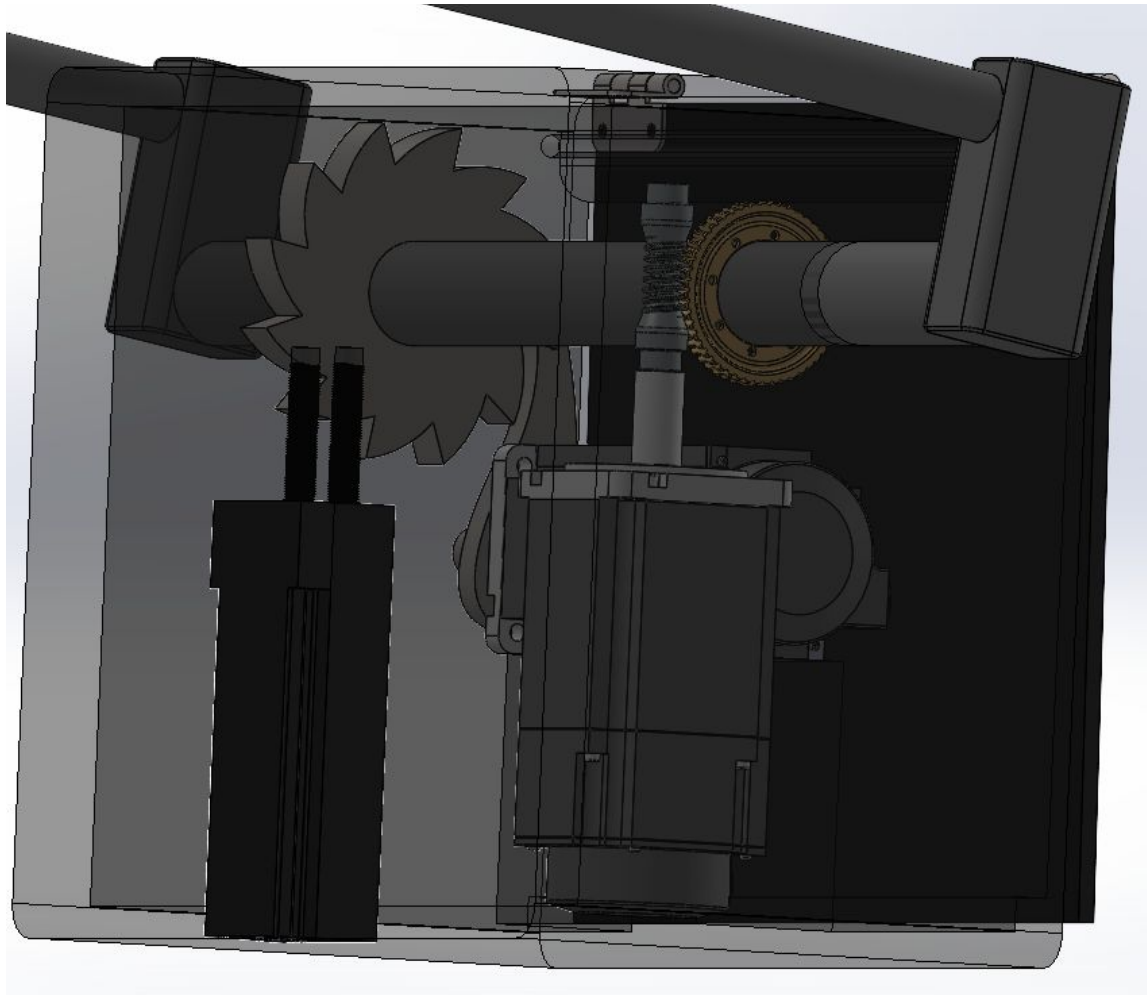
CAD model of the final design chest support from a zoomed in perspective
